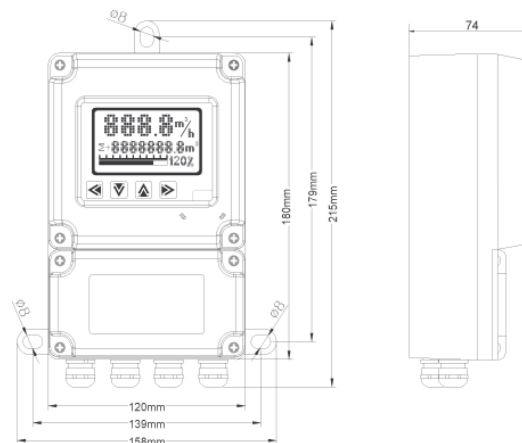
dimensions of the DIMPO 02 Transmitter
